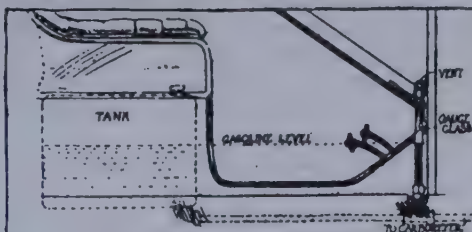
Showing How a Gasoline Gauge Can be Fitted to a Car
